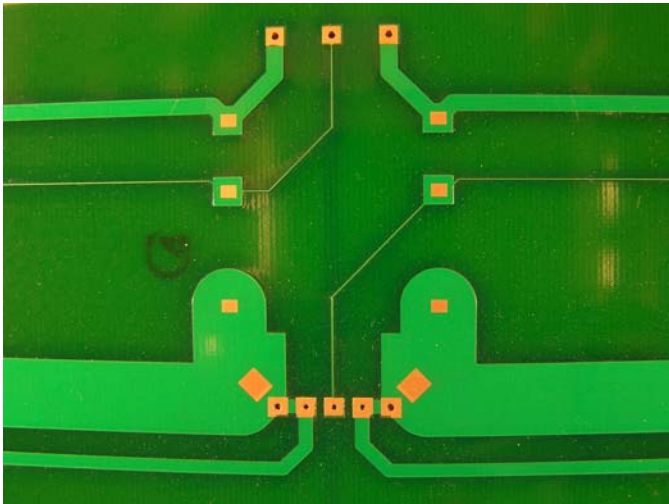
Photograph of Test Board Showing Solder Mask Defined Pads
